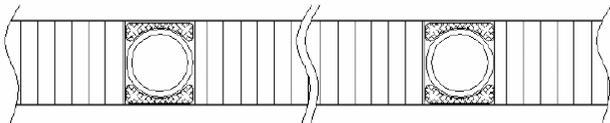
Configuration with heat pipes embedded in a sandwich panel with graphite foam saddles.
